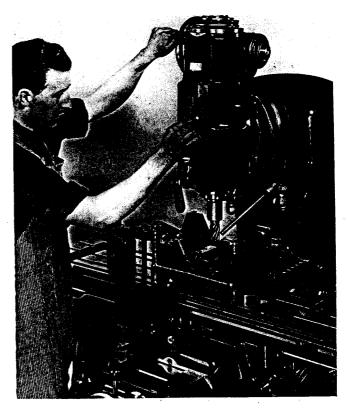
A typical step-milling job. One horizontal surface has been end-milled, the gage block for that depth has been replaced by one for the next depth of cut and the operator is lowering the spindle until the stops bear against the gage block, preparatory to milling the next surface.
